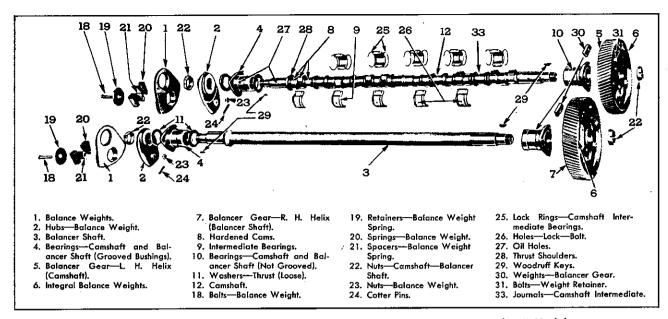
Camshaft and Balancer Shaft Details—Six Cylinder Engines—"B" and "C" Models.
